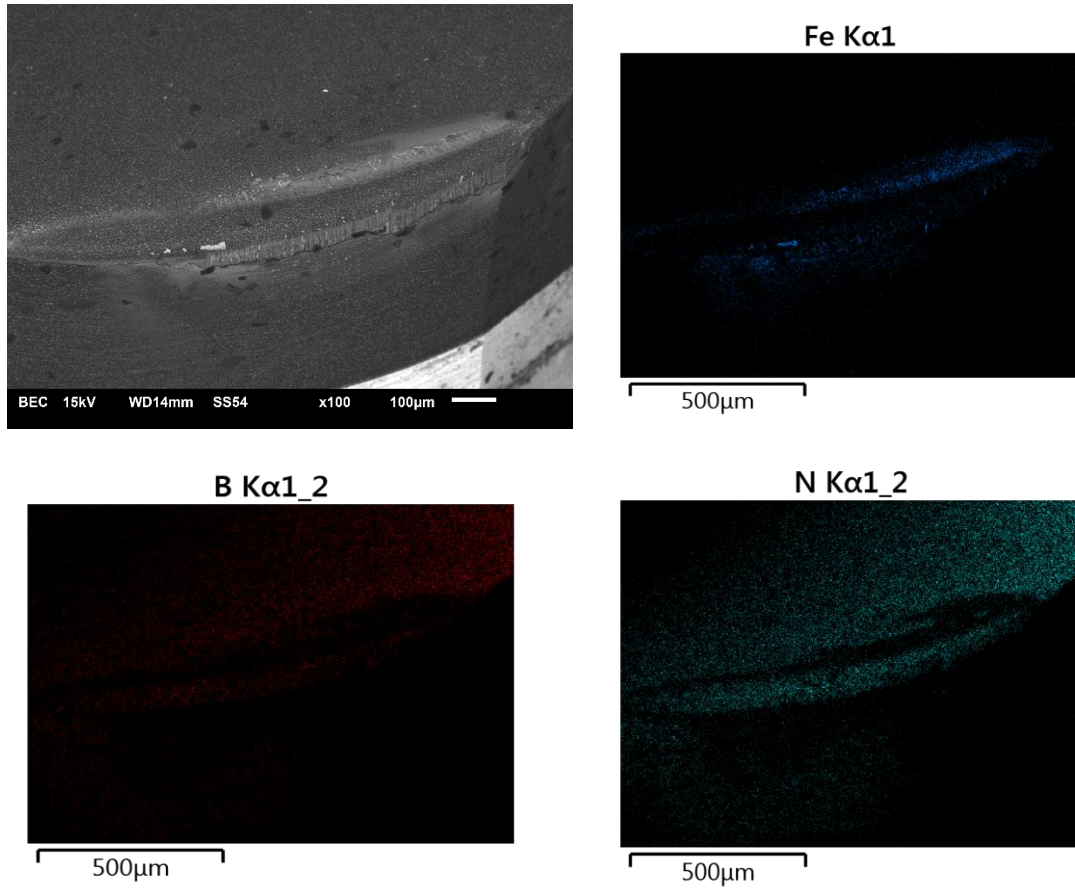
EDS mapping on CBN tool tip after cutting GCI workpiece with free ferrite content between 0 – 2.0 %.
